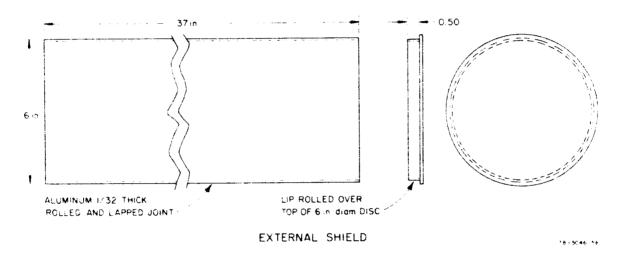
DIMENSIONS OF EXTERNAL SHIELD FOR 8-MONTH-STORAGE TEST UNITS
